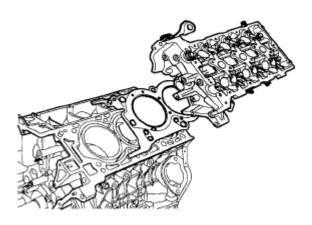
Identifying Cylinder Head Marking 3R (RH Shown) Courtesy of HYUNDAI MOTOR CO.
